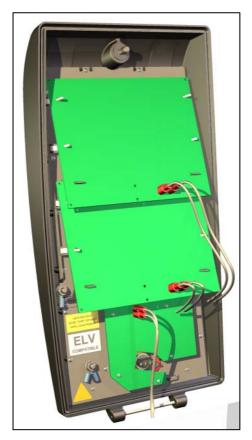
Nearside Mk2 Combined Unit - Shows the Three PCBs
